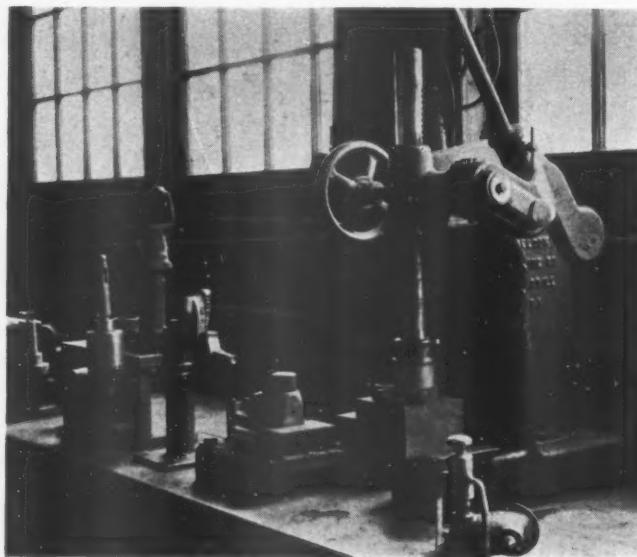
Special tools and devices used in reconditioning Vapor 2-in. steam-heat connectors
